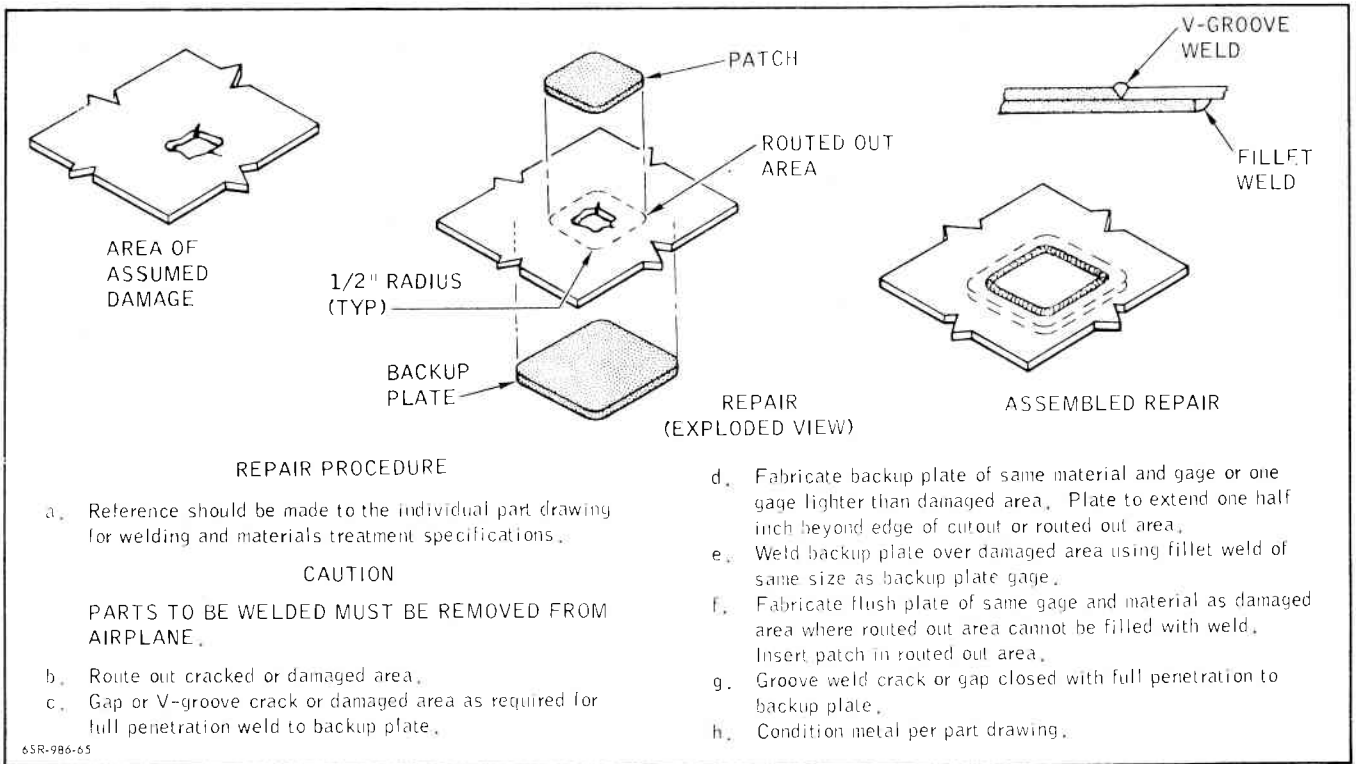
E. Welded Crack Repair for Welded Assemblies
